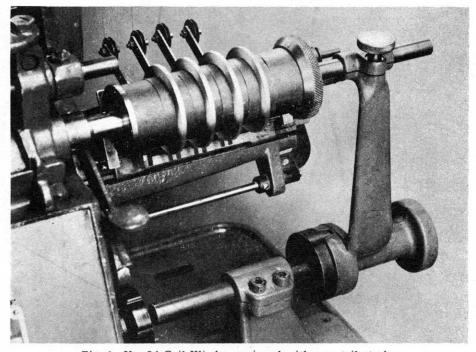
No. 84 Coil Winder equipped with new tail stock.
